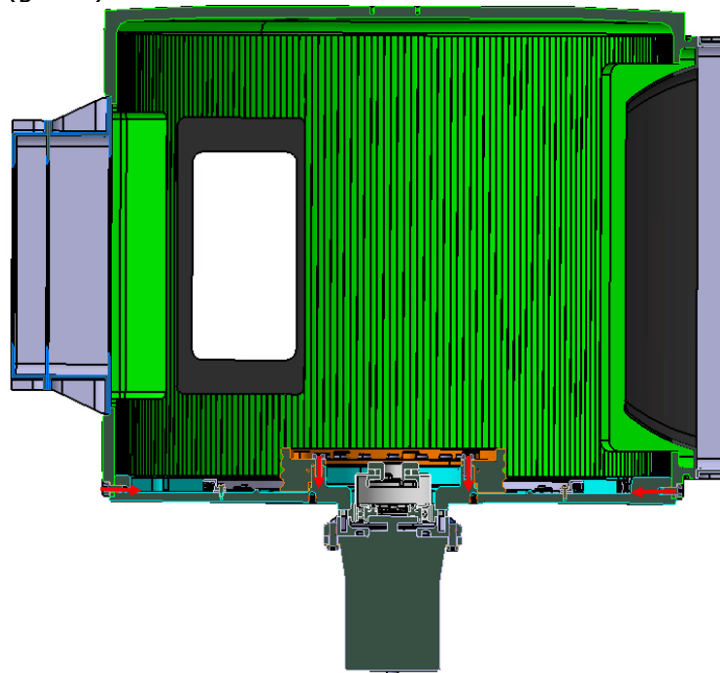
Grounding of Base Support (light blue) with Ball Bearing assembly (orange) and Housing (green)-cut view
